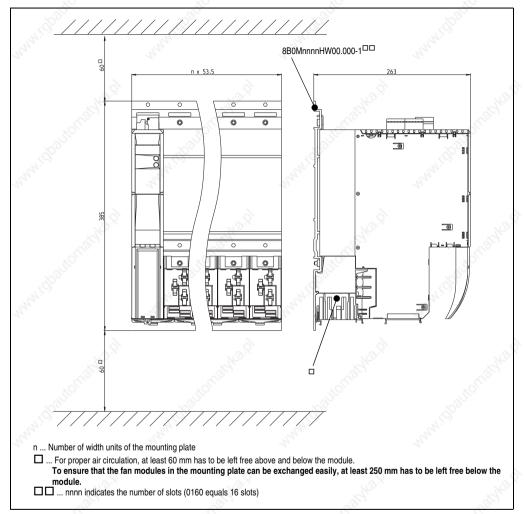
Dimensional diagram and installation dimensions for 8B0C0160HW00.001-1, 8B0C0320HW00.002-1
